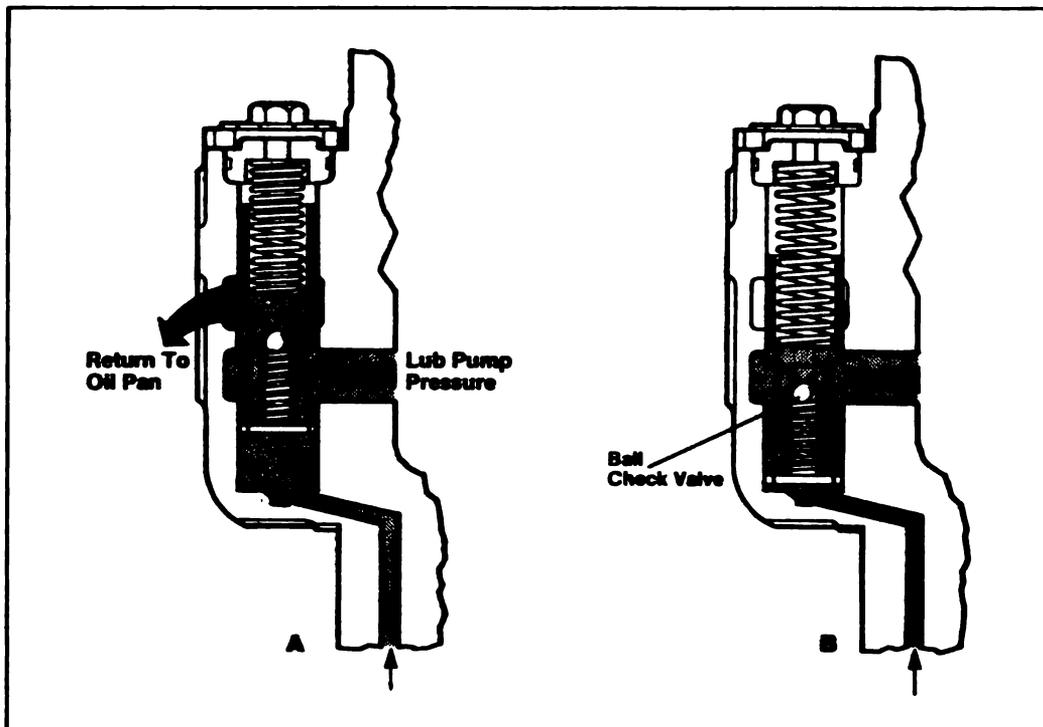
NTE Oil Pump Pressure Regulator.
